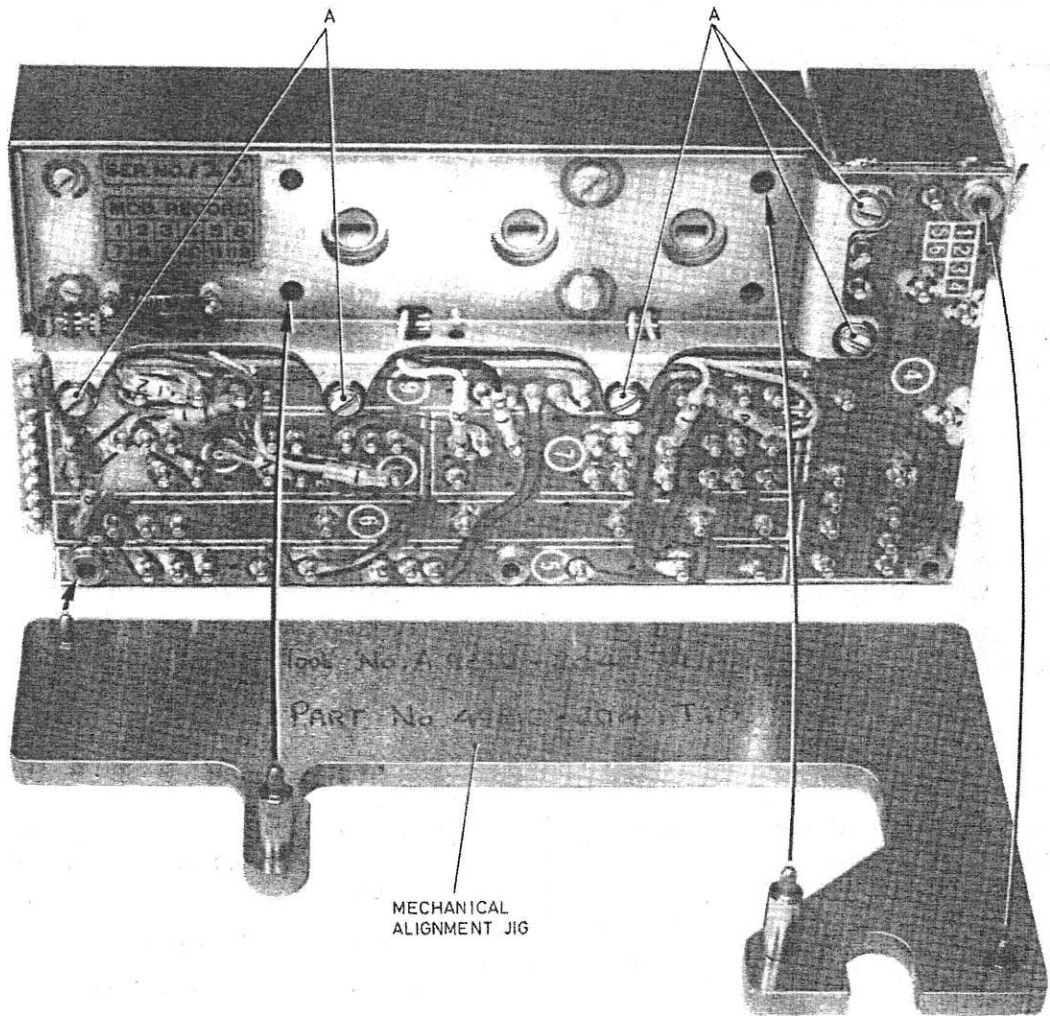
Fitting synthesizer-to-motherboard mechanical alignment jig
